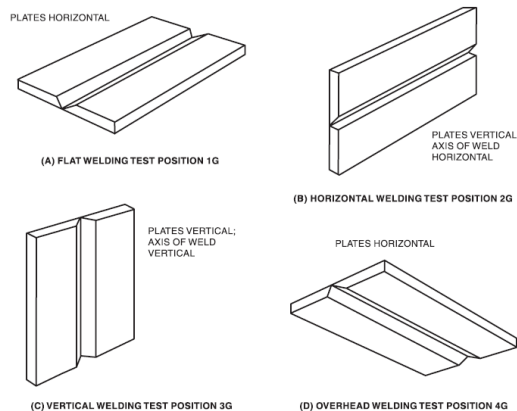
Positions of Test Plates for Groove Welds (see 4.3.4)
